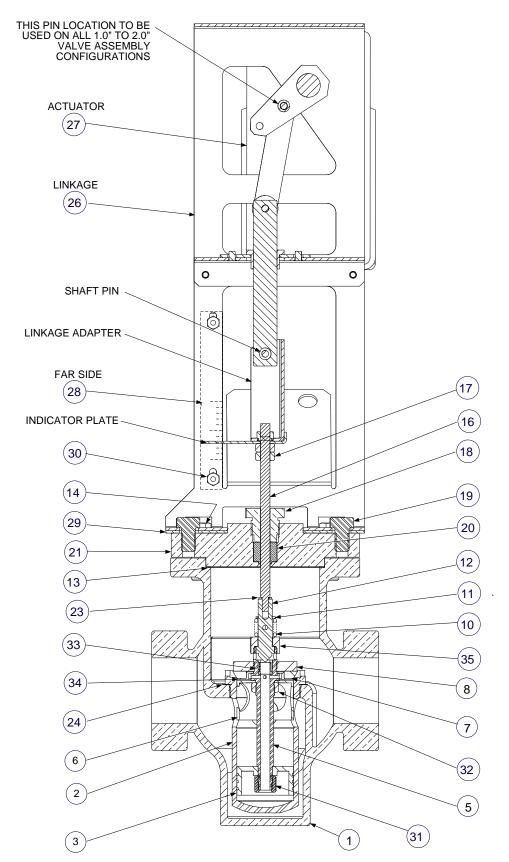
Valve Assemblies, Type CXT-E (P/N 24036) (Sizes 1.00" To 2.00")
